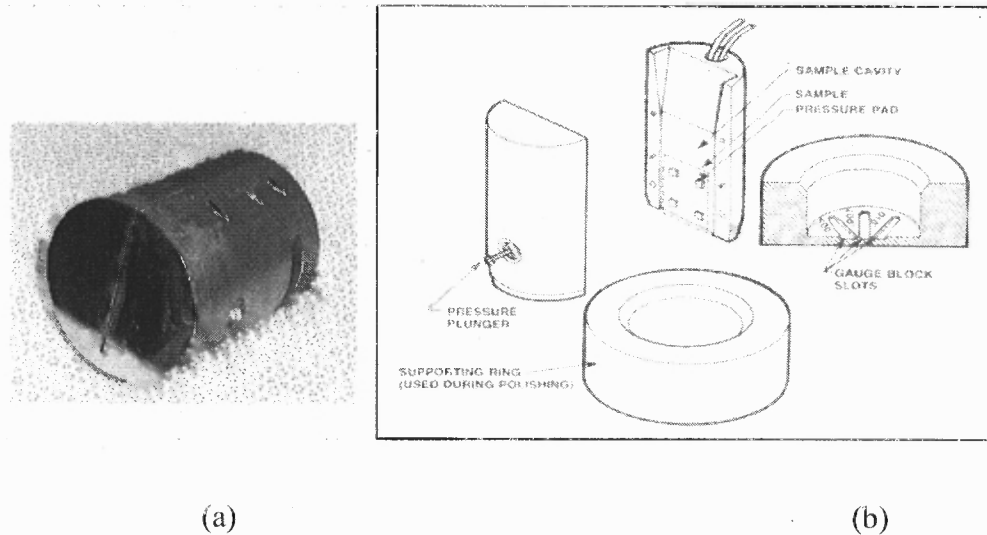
Cross section polishing chuck, (a) Photograph of sample mounting chuck and (b) detailed schematic of the sample mounting chuck
